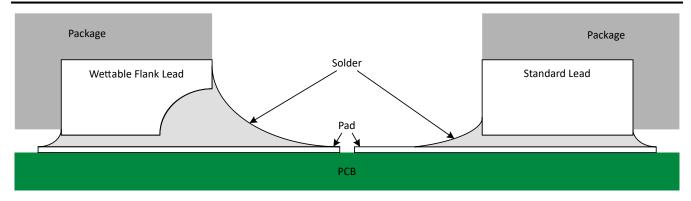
Simplified Cutaway View of Wettable-Flank QFN Package and Standard QFN Package After Soldering
